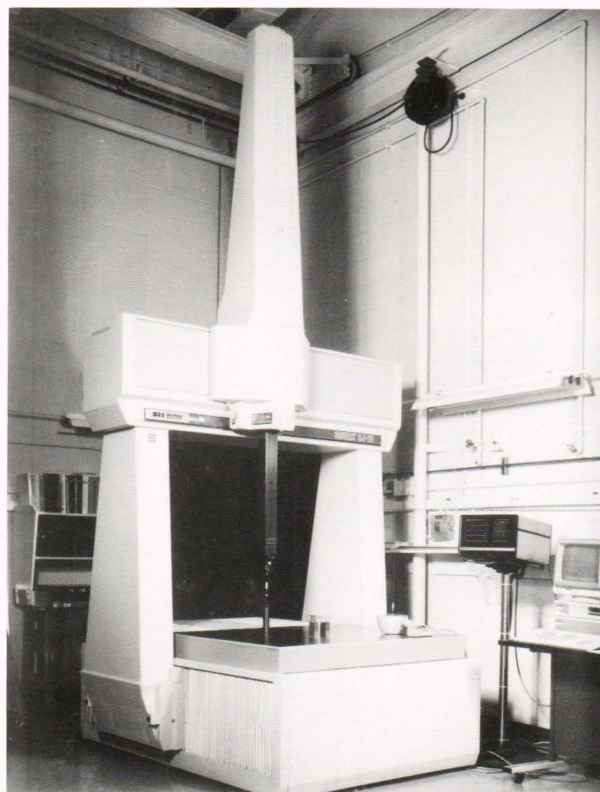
Computer-controlled coordinate measurement apparatus used to check the dimensions and tolerances of manufactured parts.
